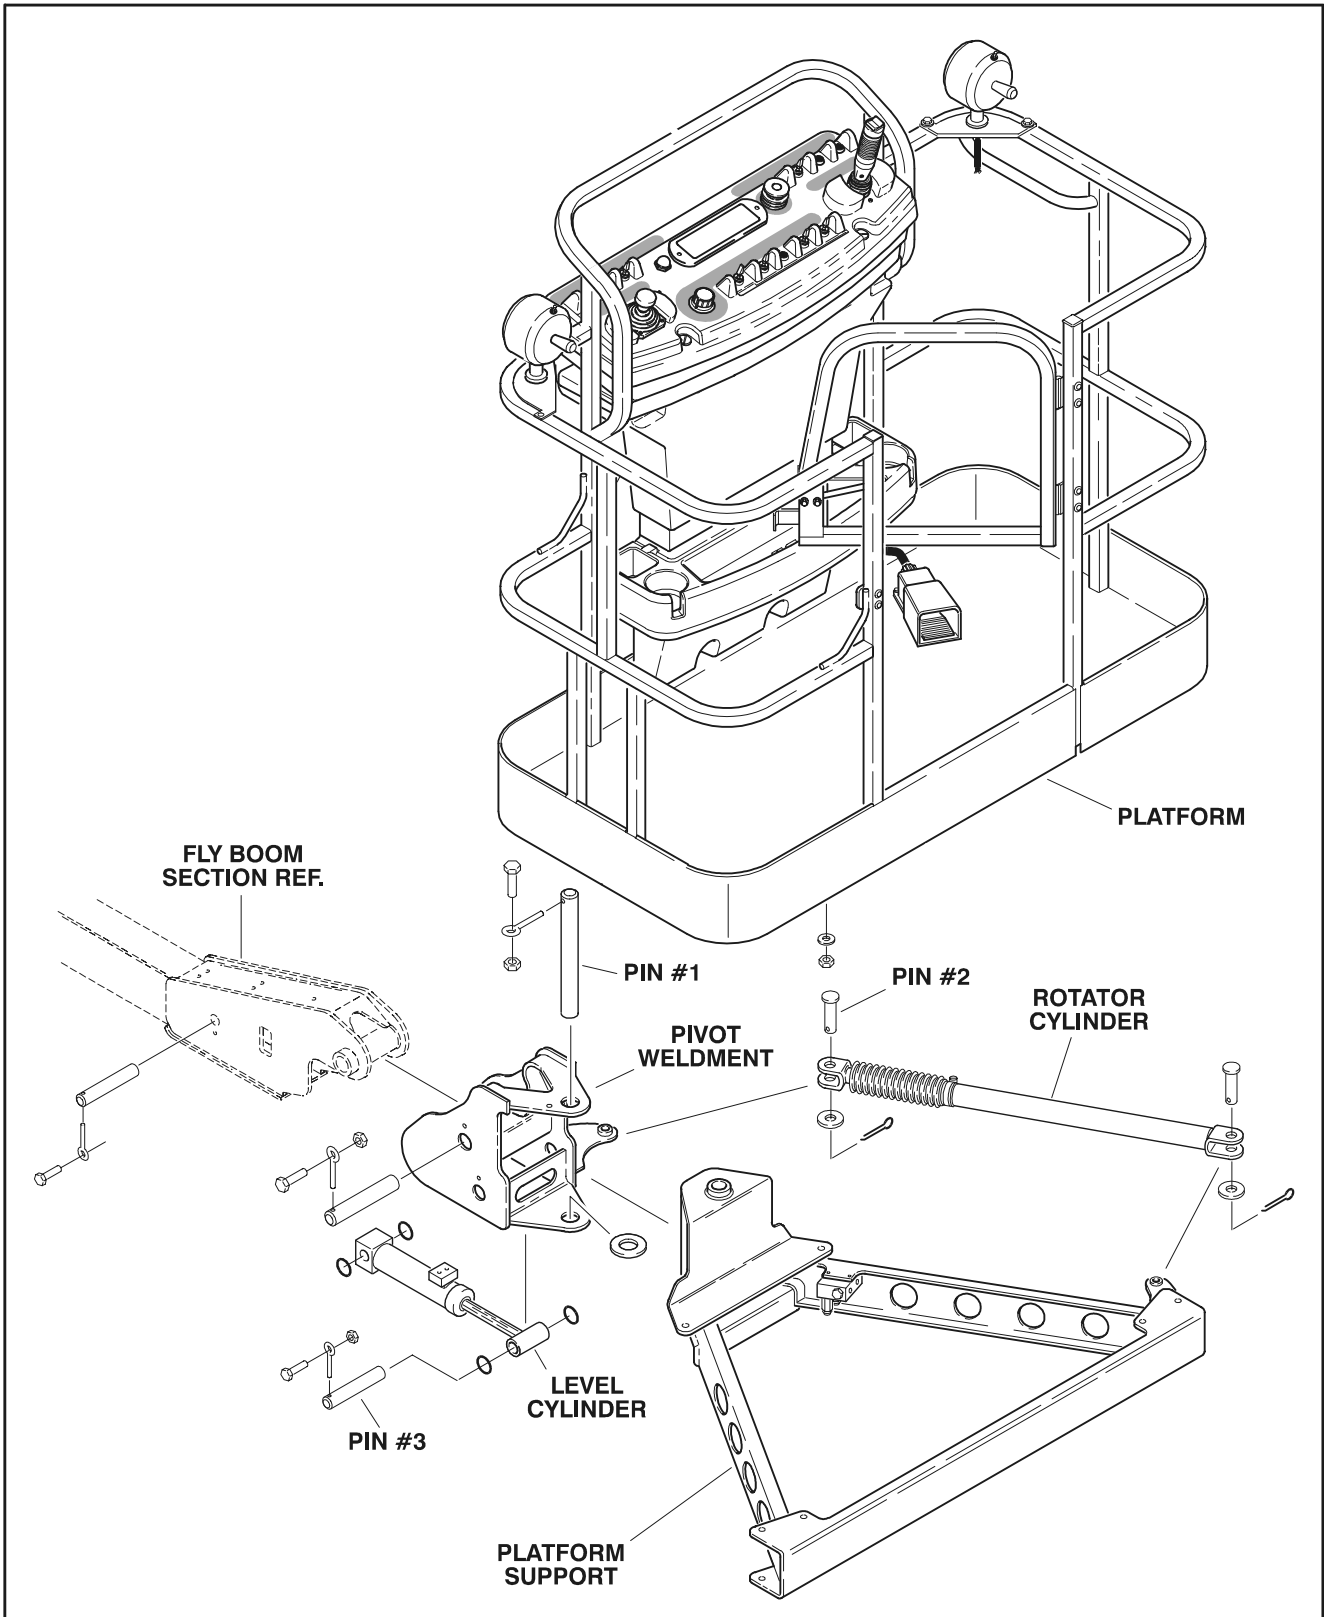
Platform Components and Attaching Hardware (M45A & E45A)
